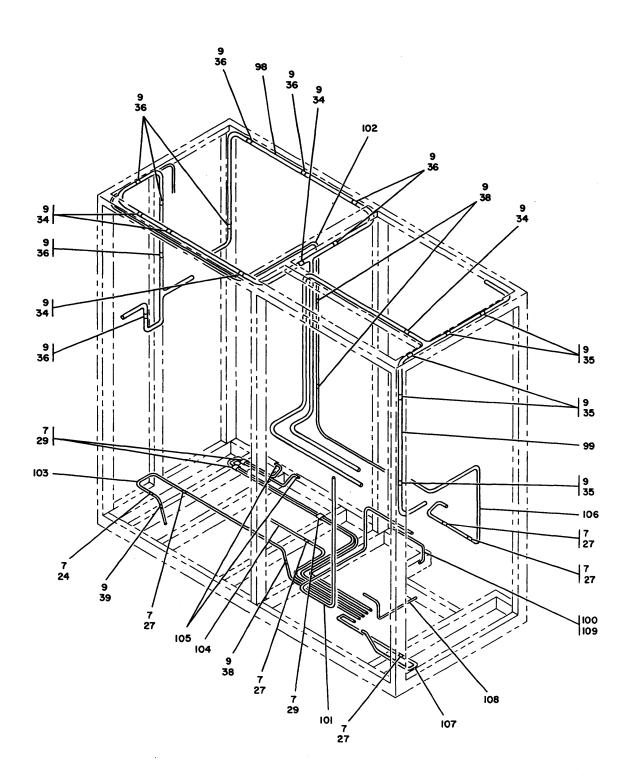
B. FINAL ASSEMBLY-2804. SHEET 3 OF 3. SEE LIST 1B.
